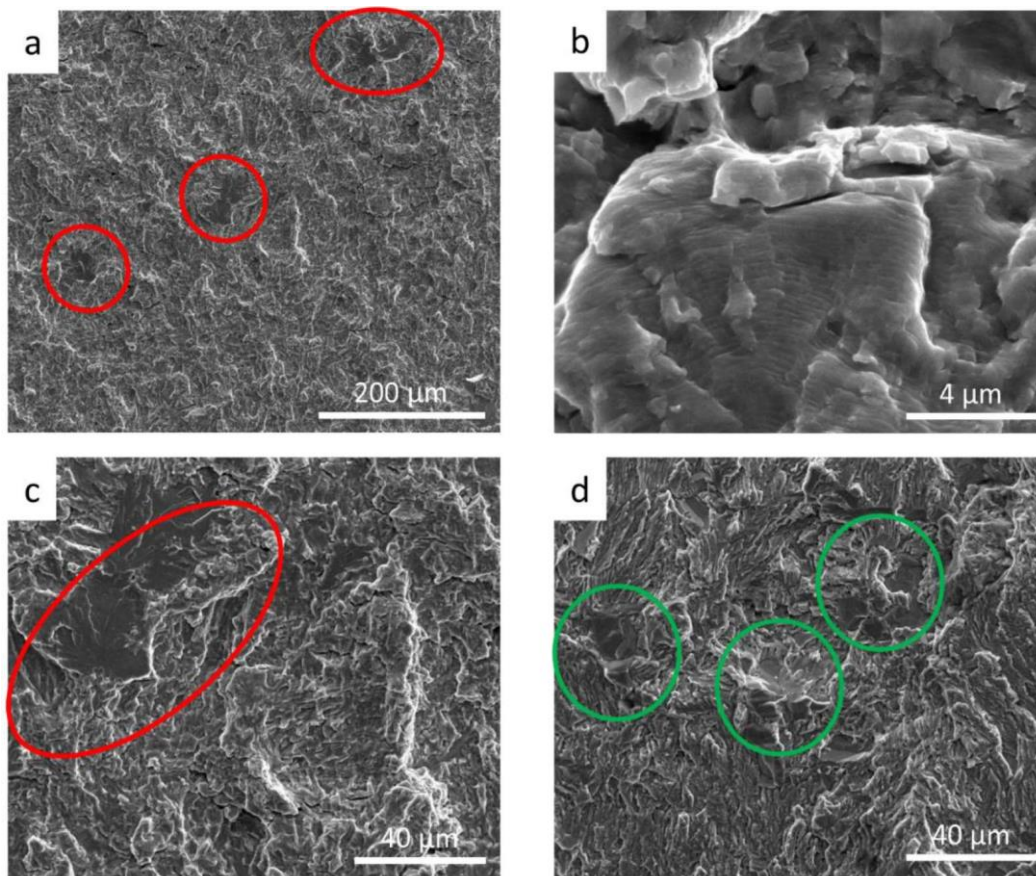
Fracture surface of sample CT-STD-1. Red ellipses indicate brittle cleavage fracture, while green ellipses indicate intergranular fracture. Crack propagation direction is bottom-top.
